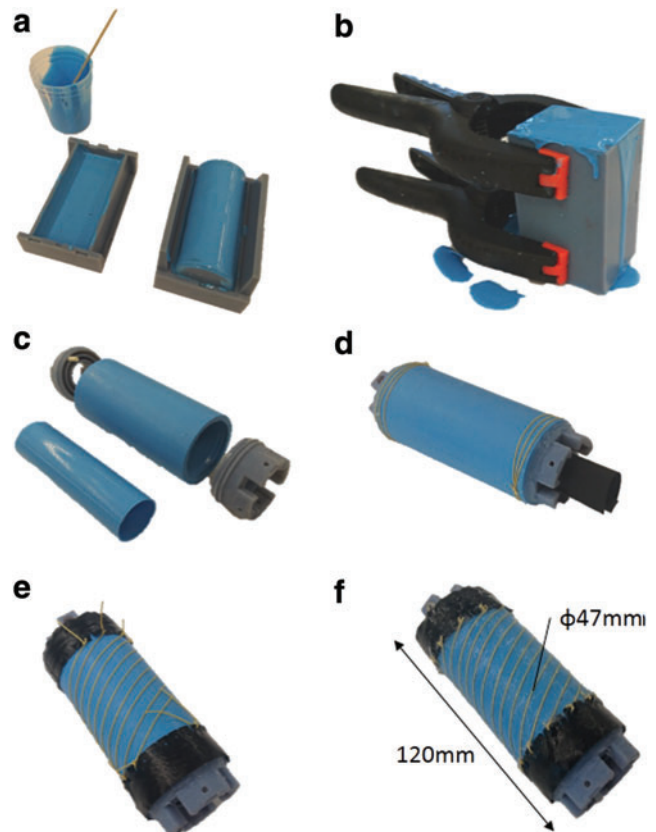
Fabrication process of the rotary module. (a) Liquid silicone rubber (Smooth-Sil 950 by Smooth-On) is poured in both halves of 3D-printed molds. (b) The two mold halves are clamped together, and then, silicone rubber is formed into a cylindrical shape. (c) Silicone cylinders and three-dimensional (3D)-printed end connectors are combined by silicone adhesive (Sil-Poxy by Smooth-On). Both inner and outer cylinders are fabricated in the same manner. (d) Both ends are tightened by fibers and reinforced by nylon sheets. (e) Kevlar fibers are attached with a helical arrangement. (f) The completed actuator is coated with silicone adhesive. Color images available online at www.liebertpub.com/soro
